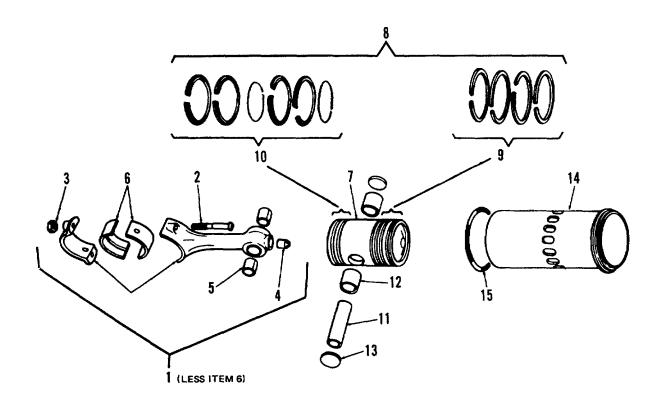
CONNECTING ROD, PISTON AND LINER
